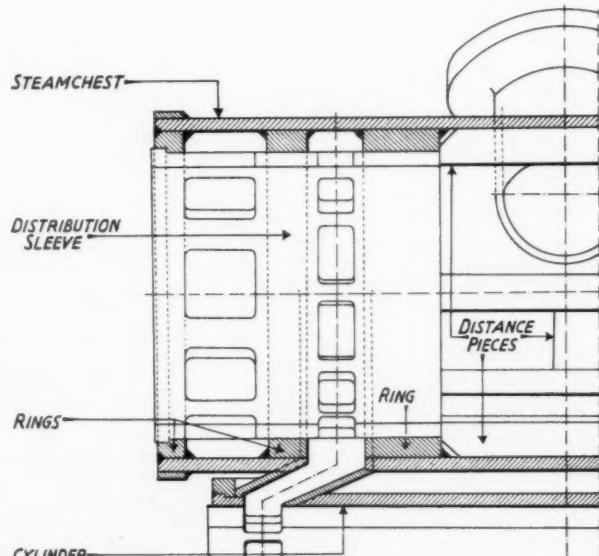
Showing construction of steamchest built from welded plate component
